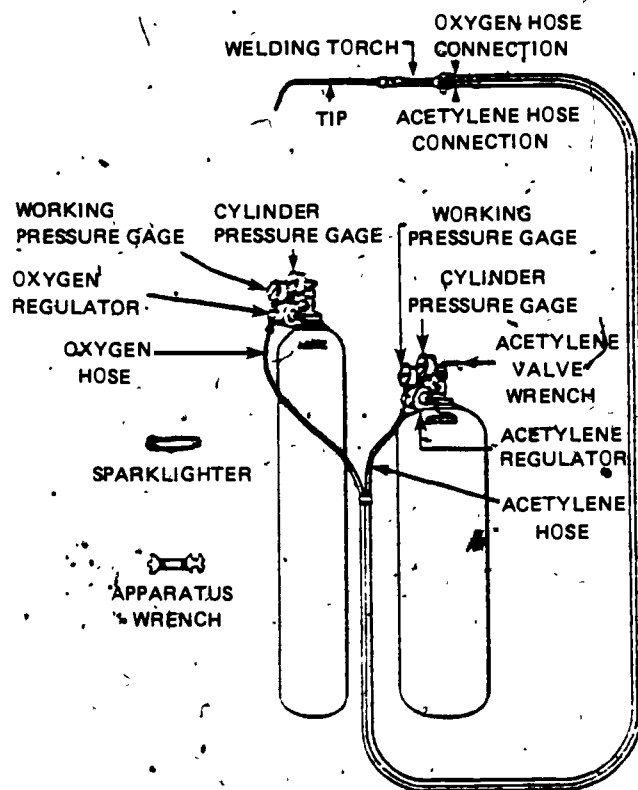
Oxyacetylene welding and cutting outfit.
